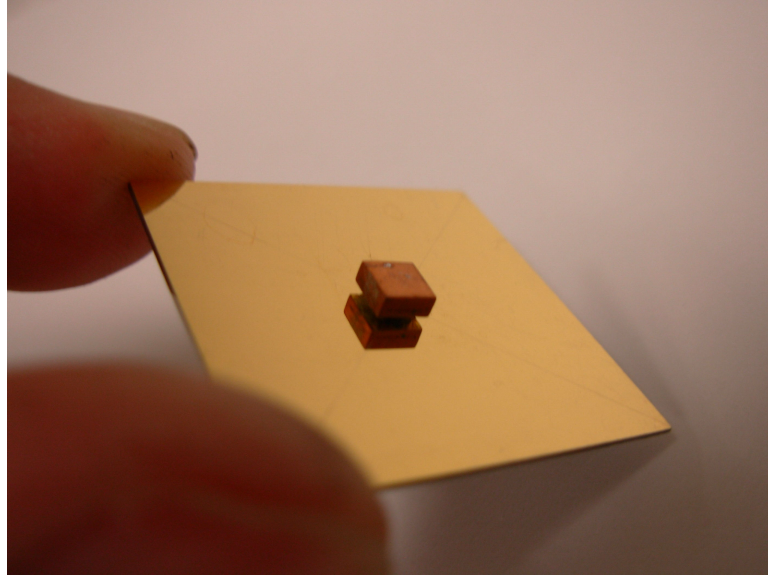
Copper mini-contact is soldered onto Au/Cr coated silicon die
